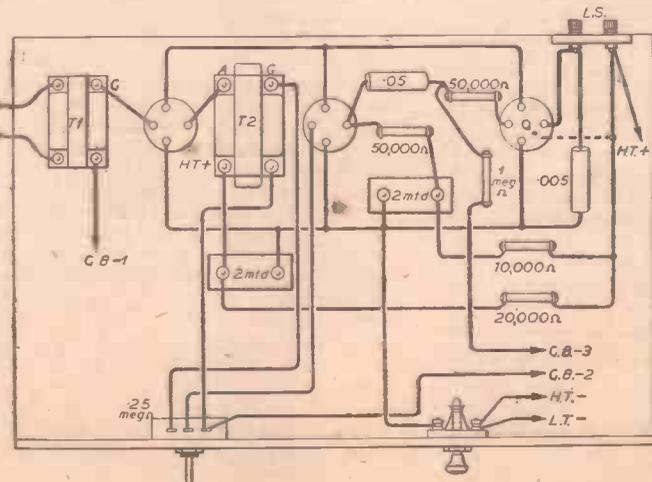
The complete wiring and layout for the three-valve amplifier shown in Fig. 3.
